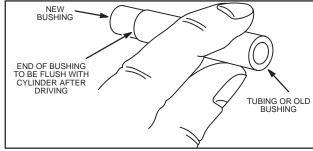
INSTALLING BUSHING AND PLUNGER
